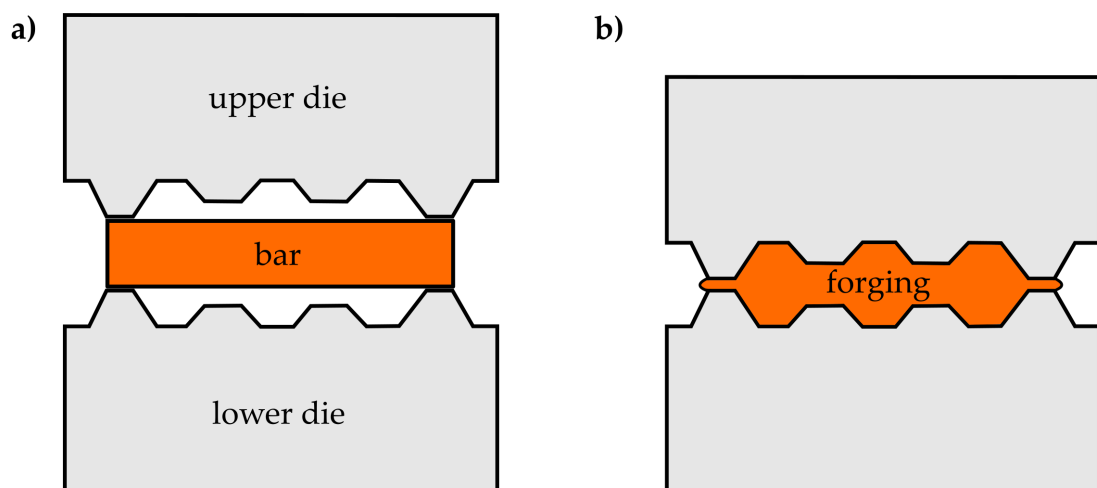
Schematic drawing of the closed-die forging process (modified after [9]). a) Bar between upper and lower die before the first forging step. b) After the first forging step a forging with flashes is obtained.
